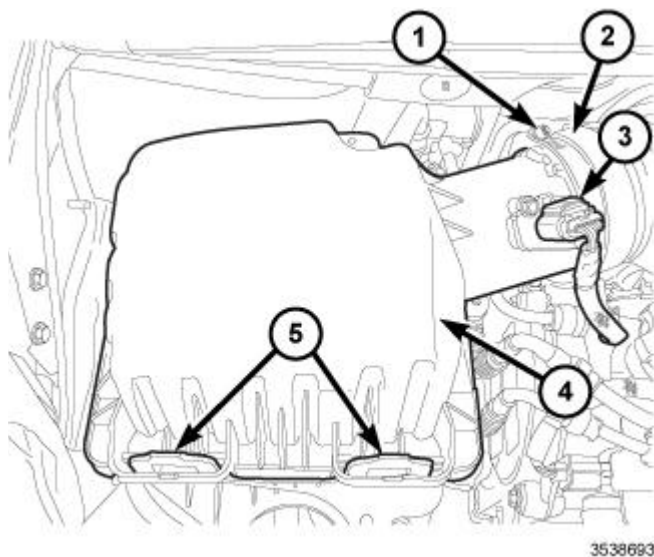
Clamp, Turbocharger Air Inlet Tube, Mass Airflow (MAF) Sensor Harness Connector, Intake Air Housing & Tabs
